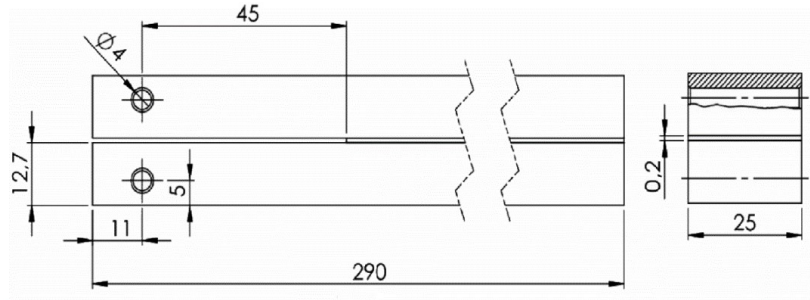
DCB and ENF specimen's geometry (dimensions in millimetres)
